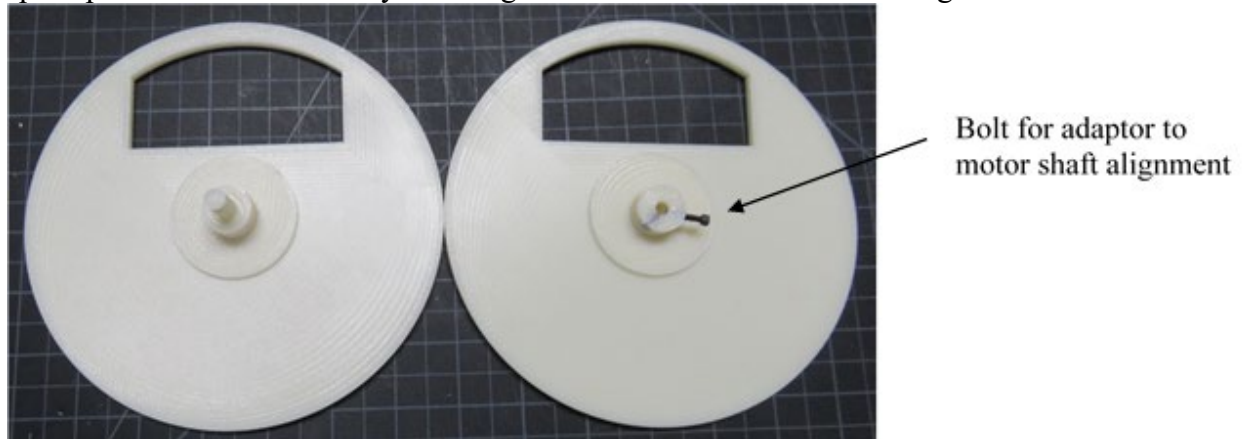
Lid adaptors for interfacing bearing and motor shaft to TEC sleeve print bed.
